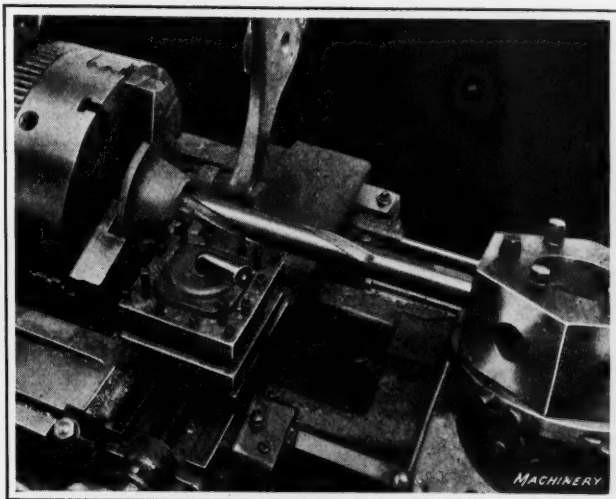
Machine set up for performing Operation on Part shown in Fig. 14
